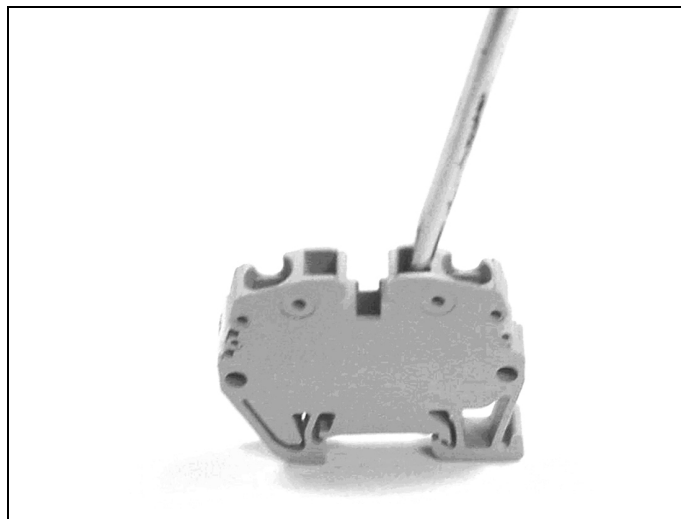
Screwdriver Inserted in the "Tool" Hole.
